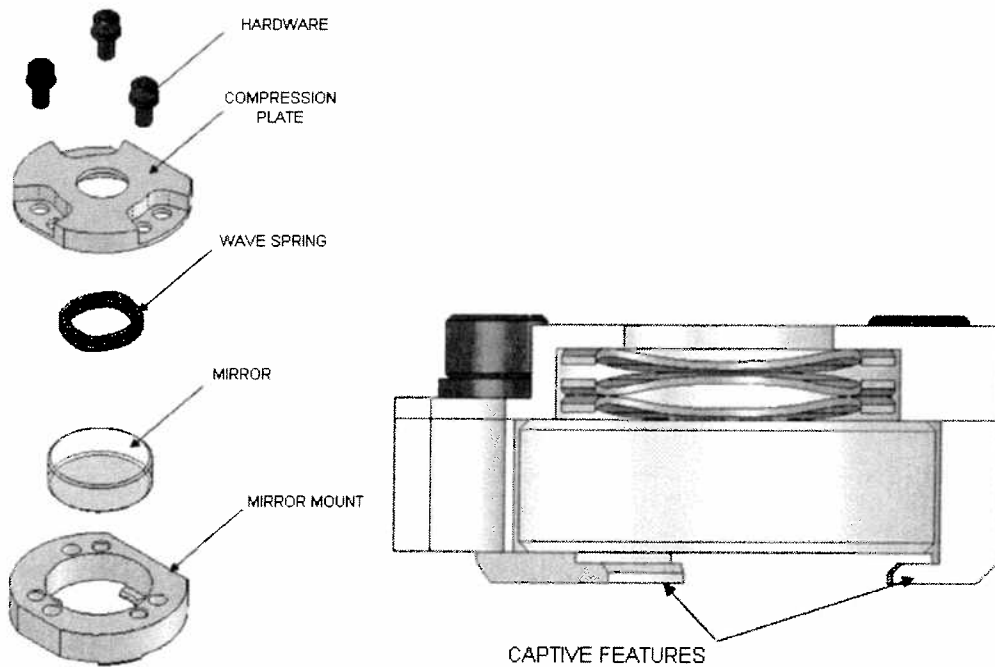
Exploded view and cross section of Mirror Mount Assembly
